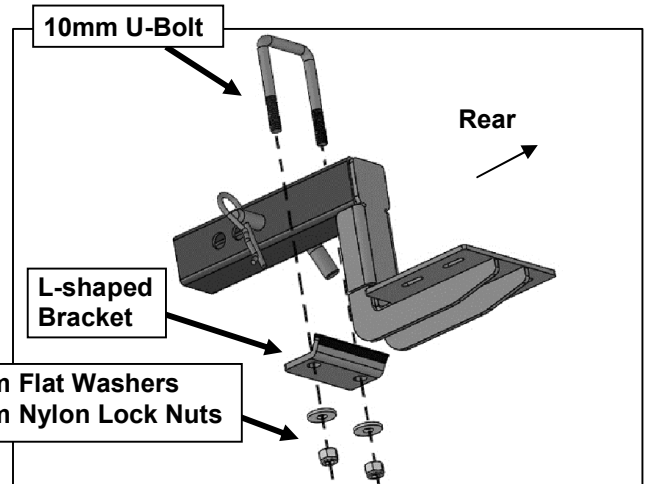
Insert Draw Bar Welded Bracket through hitch opening
